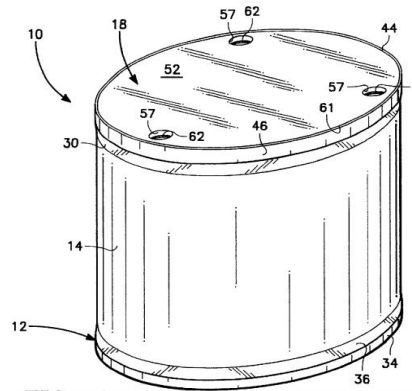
US Patent 6,343,749 B1 shows the Bearikade bear canister assembly from a top isometric view [11].
